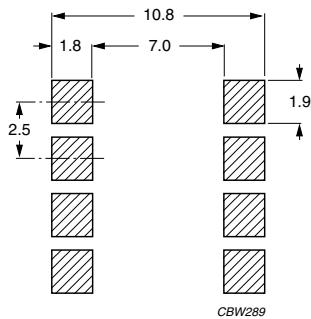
Solder lands for wave soldering of CMS4-11/3/4.8.
